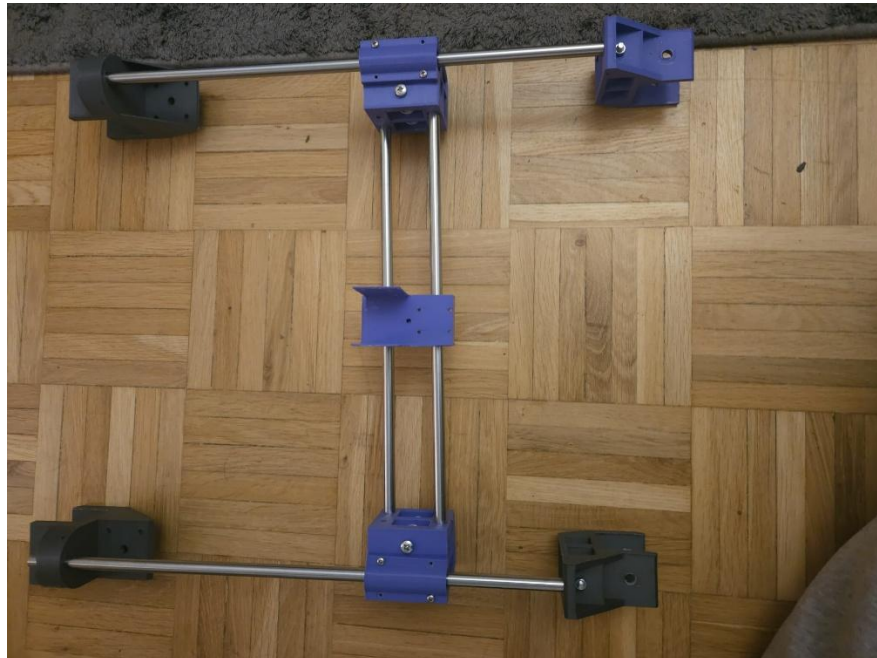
shows the Core X-Y mechanism with a false extruder.
